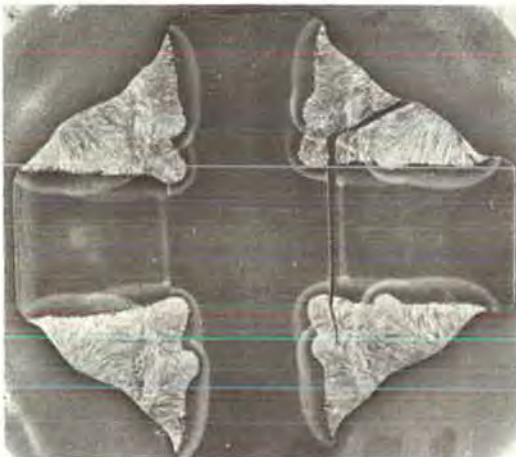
Fatigue crack growth from root of partial-penetration load-carrying fillet welds.
